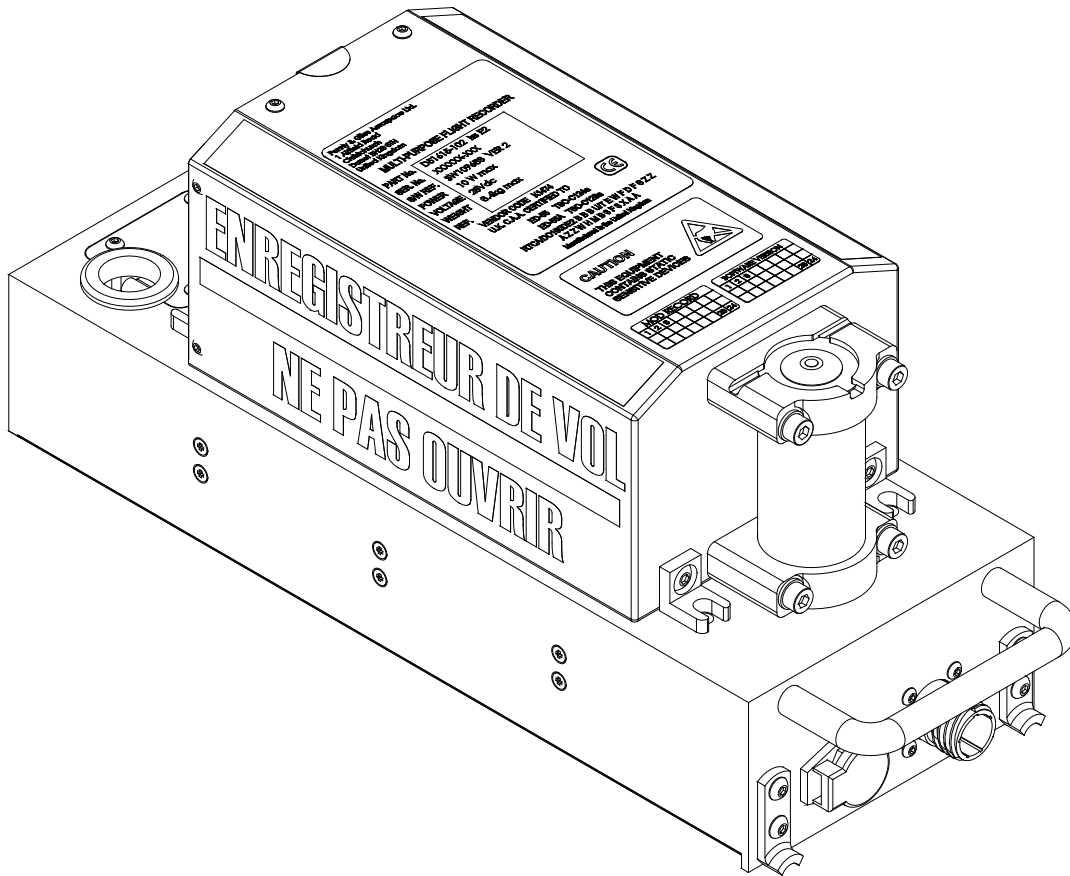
DIMPFR Mounting with Adaptor Tray D51618
